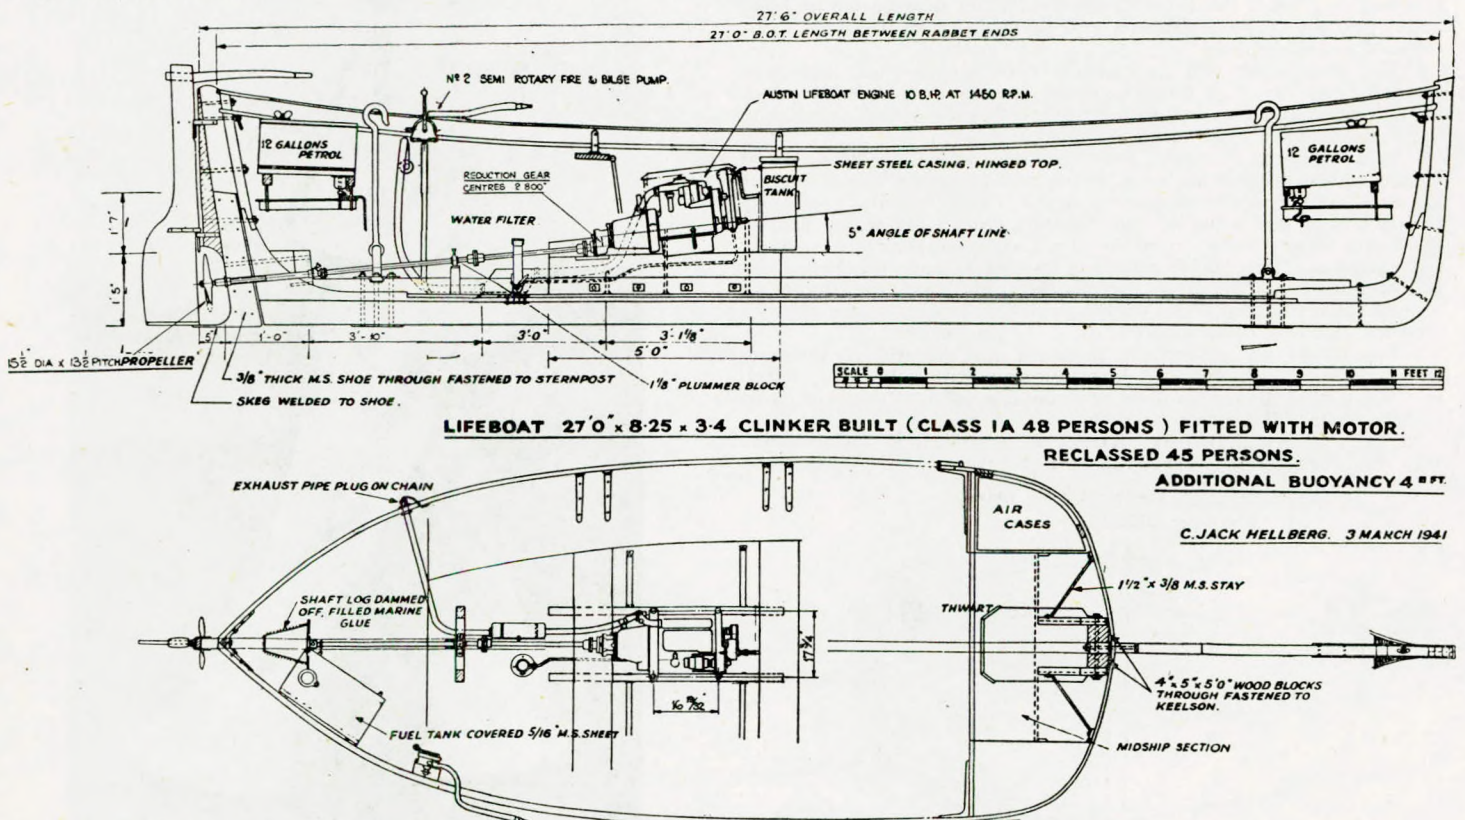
Lifeboat with petrol motor installed (power unit has forward and reverse gear with reduction gear of 1-80 to 1).
